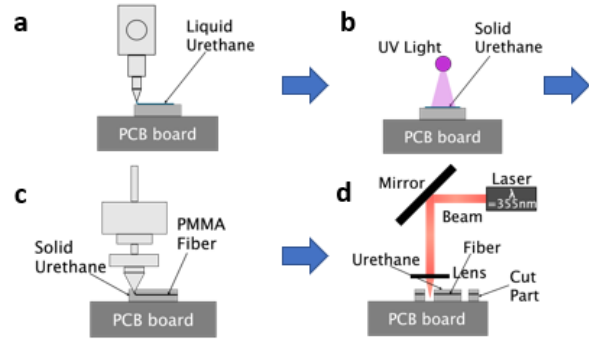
Using a composite additive and subtractive LE-DPAM process for producing CCS optical fiber interconnects on a PCB board. (a) The LE-DPAM printing process for fabricating an optical interconnect where an FDM additive manufacturing tool is used to print an ABS base on a PCB board to get the fibers to the correct end facet heights to align components and a cladding material is micro-dispensed onto the substrate. (b) The cladding material is cured with UV energy. (c) The fiber is embedded within the cladding material. (d) The end facets are prepared using a subtractive laser process, and finally components are mounted to the board where communication is via the CCS optical fiber interconnect.
